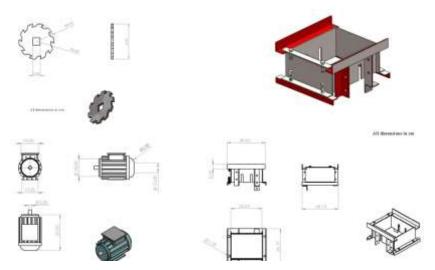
3D Components Modelling of the Shredder with Sectional Dimensions
